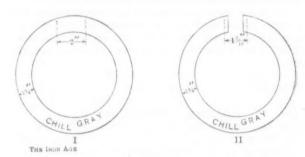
I. Ring Before Cutting. II. Ring After Cutting.
